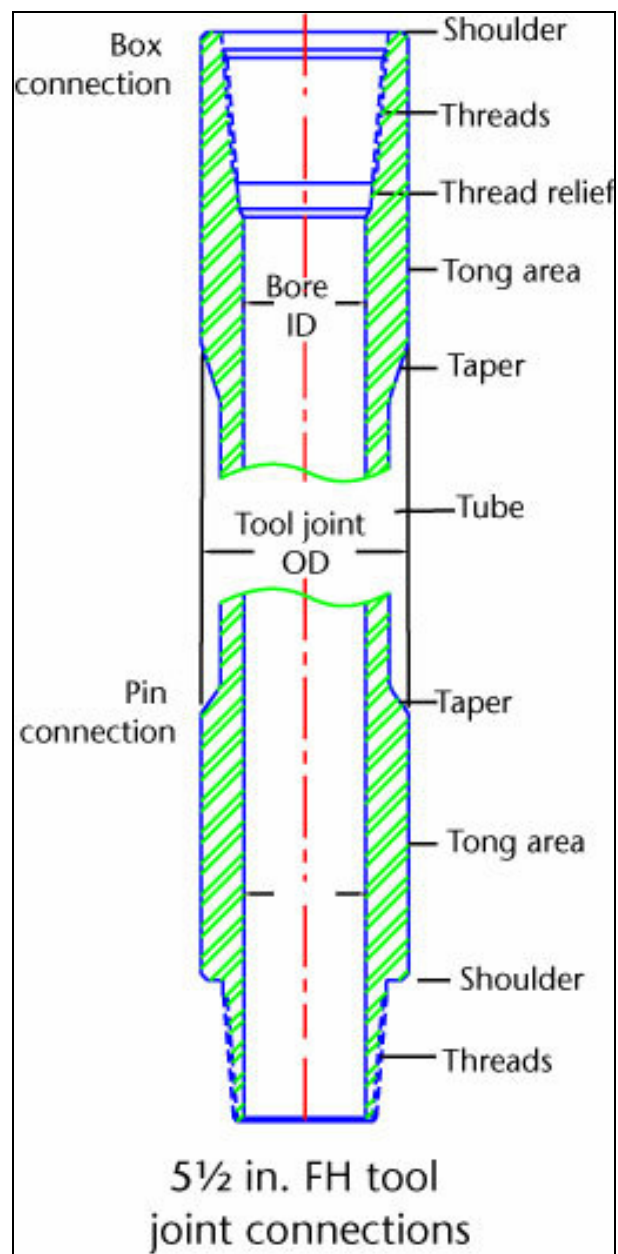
Schematic of the box and pin ends of a joint of pipe. ID = internal diameter, OD = outside diameter, FH = full hole.³²
